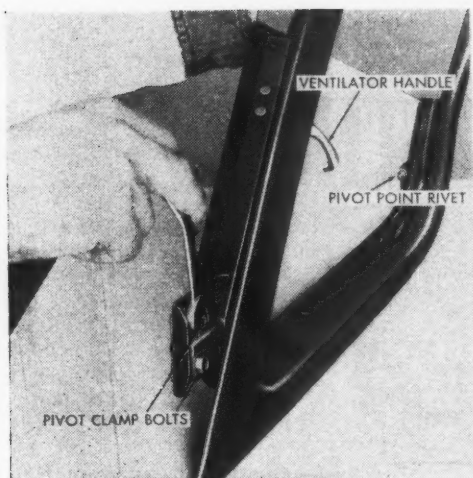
Remove the vent assembly from the molding by loosening the pivot clamp bolts.
